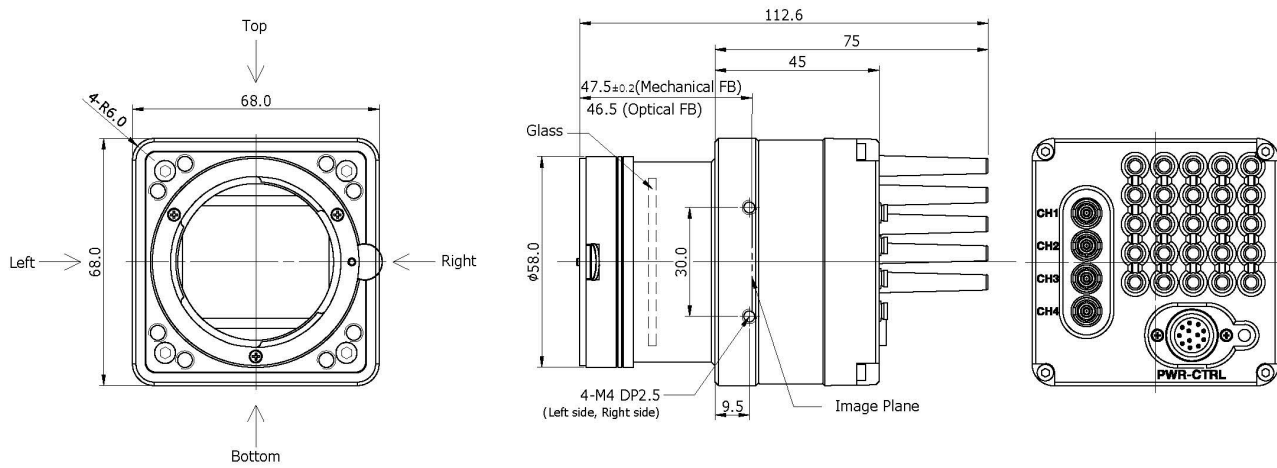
VCS-14MX2-M/C340I-HS Drawing
